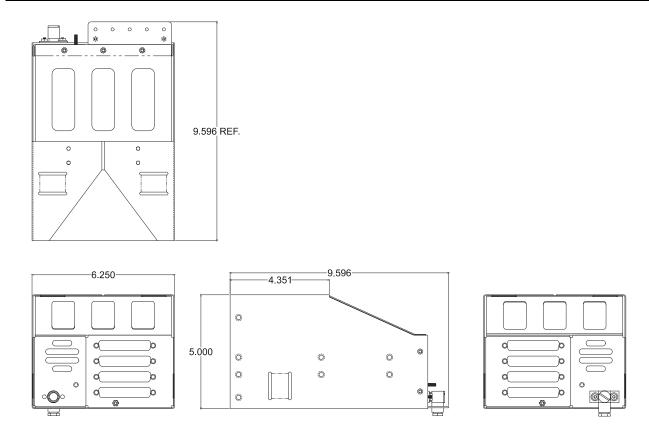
MX20 Mounting Tube Assembly Dimensions
